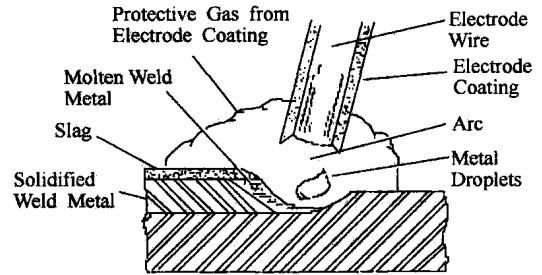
Shielded metal arc welding. The coating of the metal stick electrode provides gas for shielding of the arc as well as protective slag over the molten metal pool.
